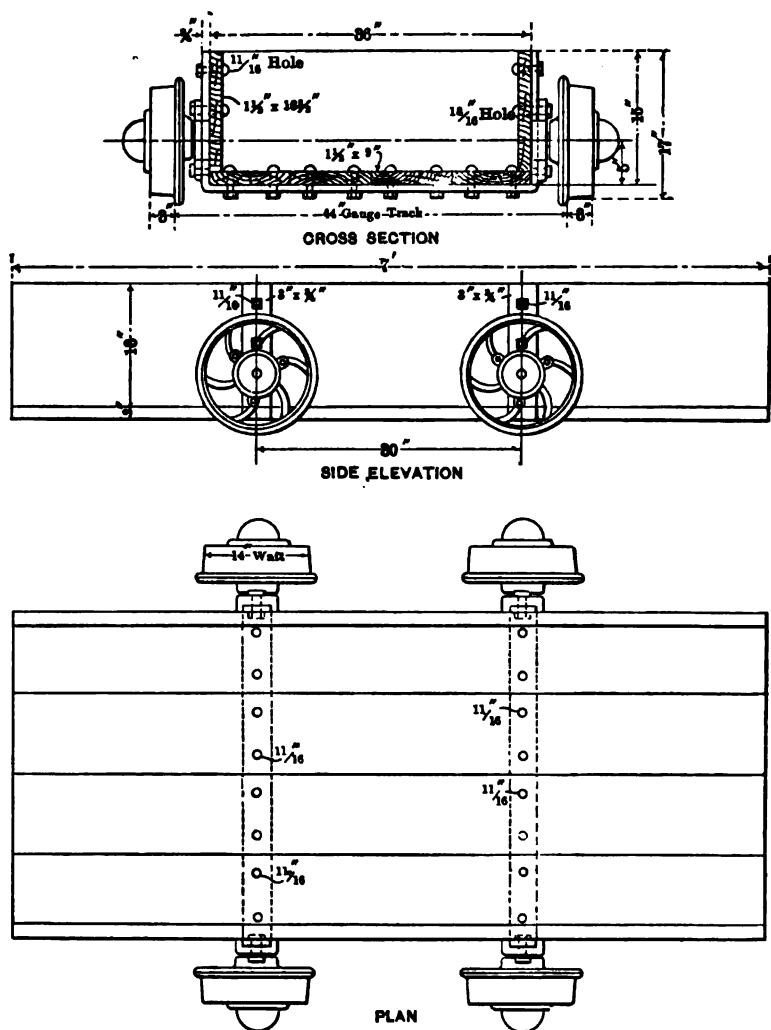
COAL-BUGGY. BUILT BY THE DECATUR CAR-WHEEL AND MANUFACTURING CO. FOR THE ALDRICH MINING CO.
